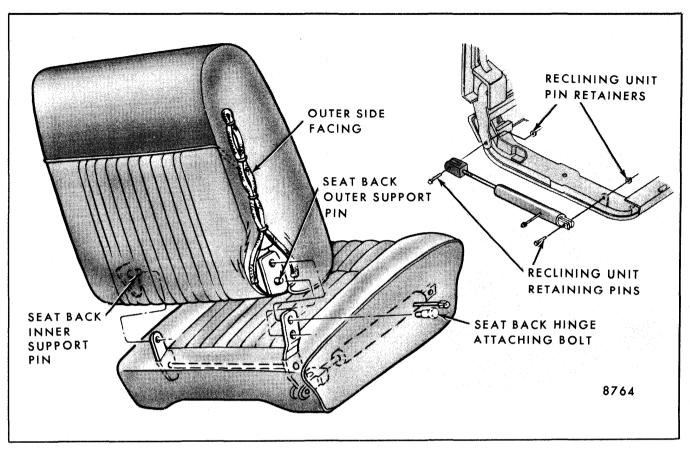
Passenger Seat Reclining Back and Reclining Unit
